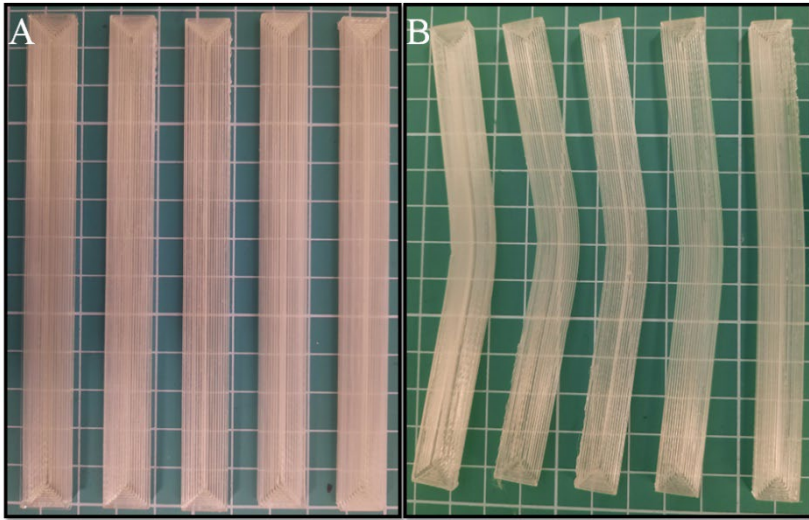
3D printed PLA samples for HDT testing, A- before the test, B- after the test
